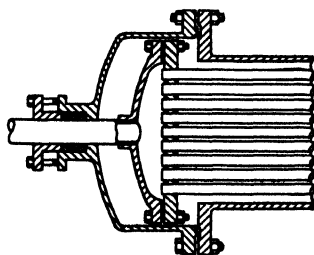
Cross section showing packing gland on pipe connected to floating head.
